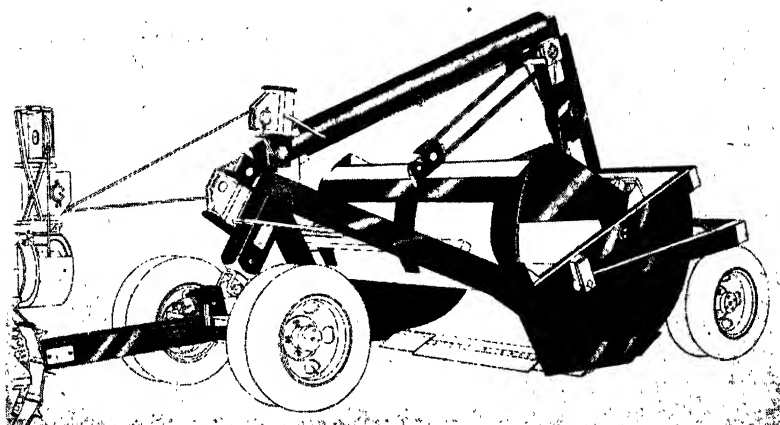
The dark shaded parts of this modern all-welded earth-moving unit were flame-cut. Note how they outline the form of the machine. (Courtesy of R. G. LeTourneau, Inc.)
